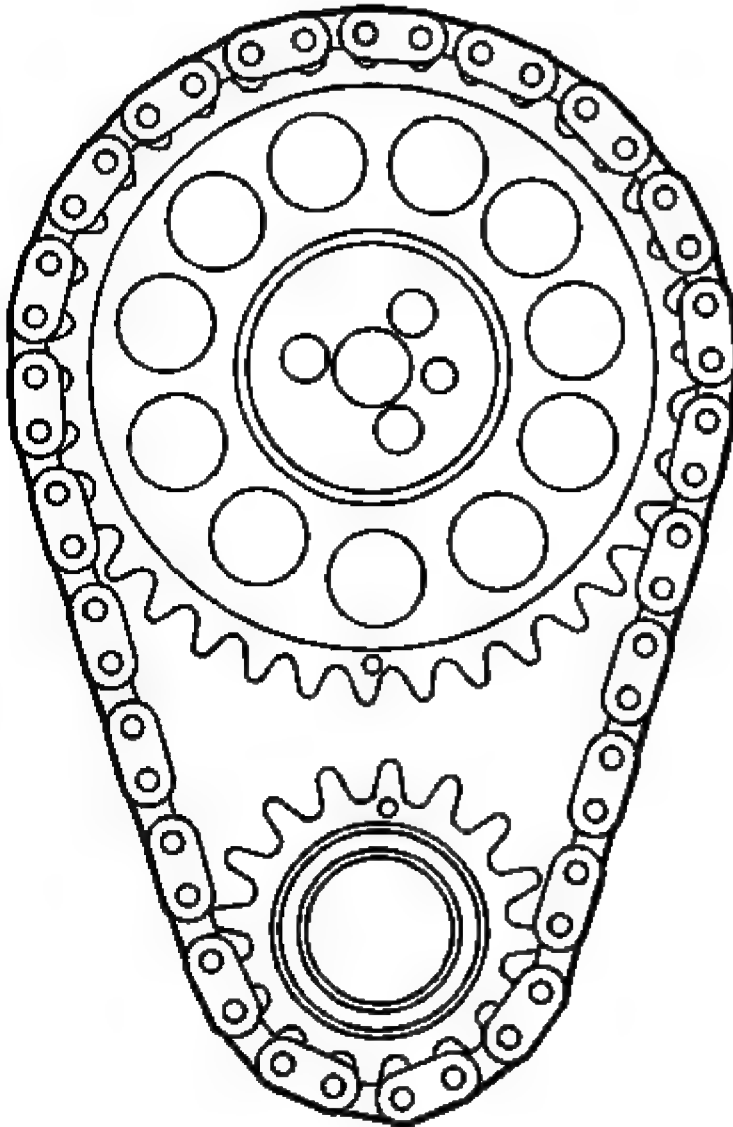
View Of Camshaft & Crankshaft Sprocket Timing Marks
